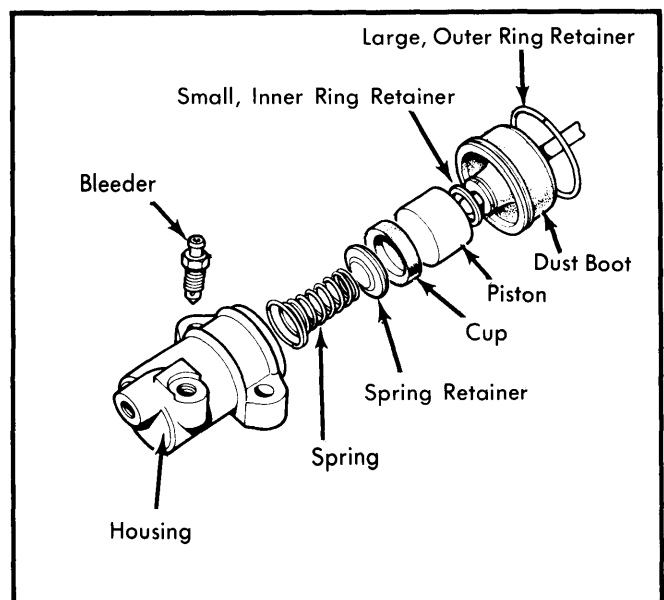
Exploded View of MGB Clutch Slave Cylinder Showing Detail of Internal Components
